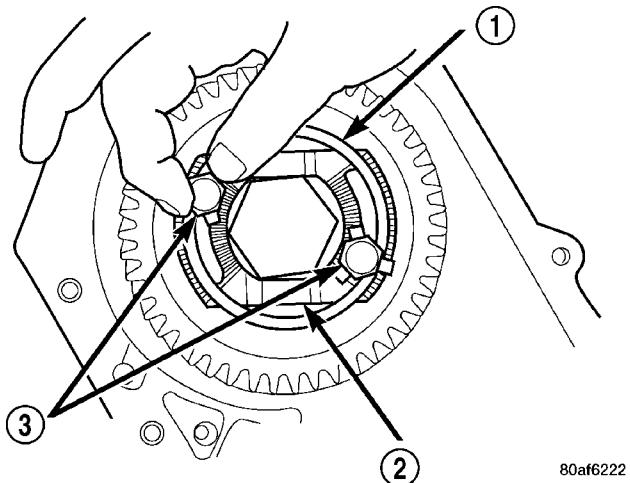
Remove Transfer Shaft Bearing Cone
